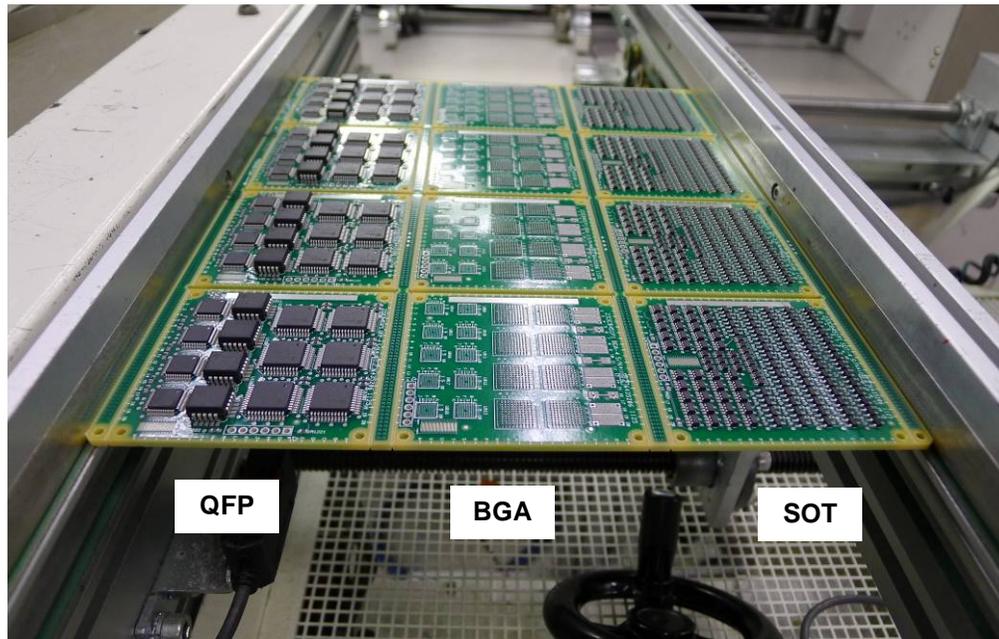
Test Vehicle Panel Assembly including QFP, BGA and SOT boards
